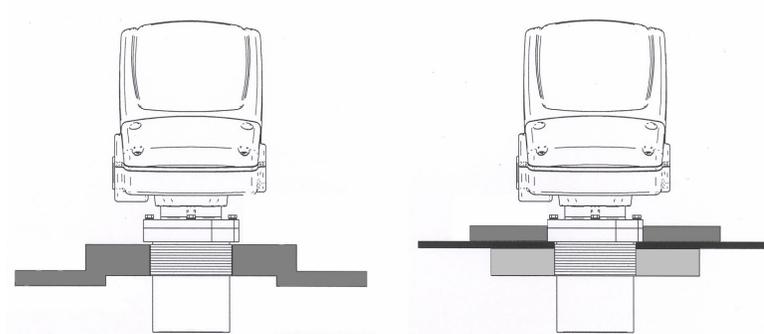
Threaded Flange/Thread-Free Flange Mounting
